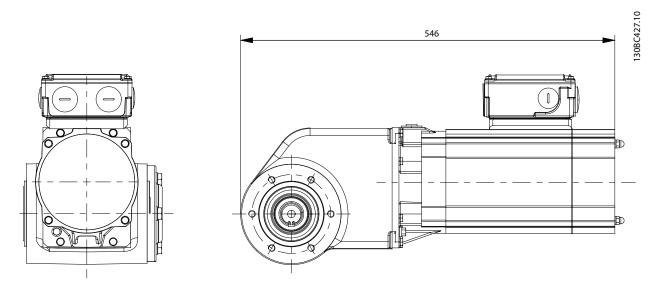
Dimensions of the VLT® OneGearDrive with Mechanical Brake Option
